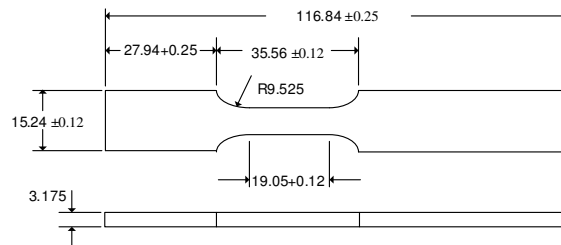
Benchmark tensile specimen geometry – Dimensions [mm].
